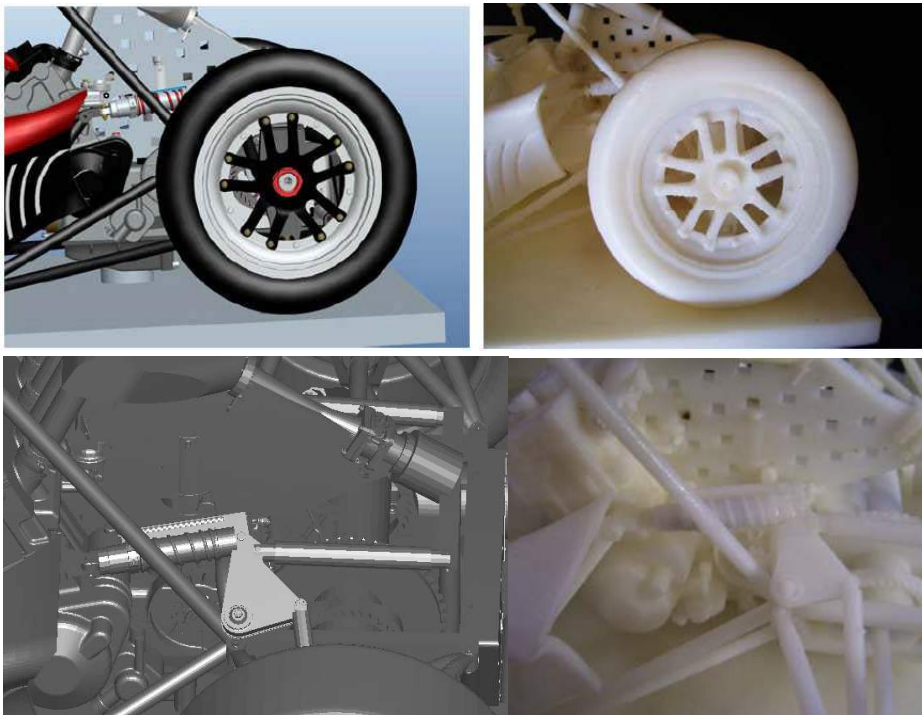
Closer looks at the CAD and physical models: (a) CAD of wheel center, (b) Printed wheel center, (c) CAD of rear shock, and (d) Printed rear shock.
